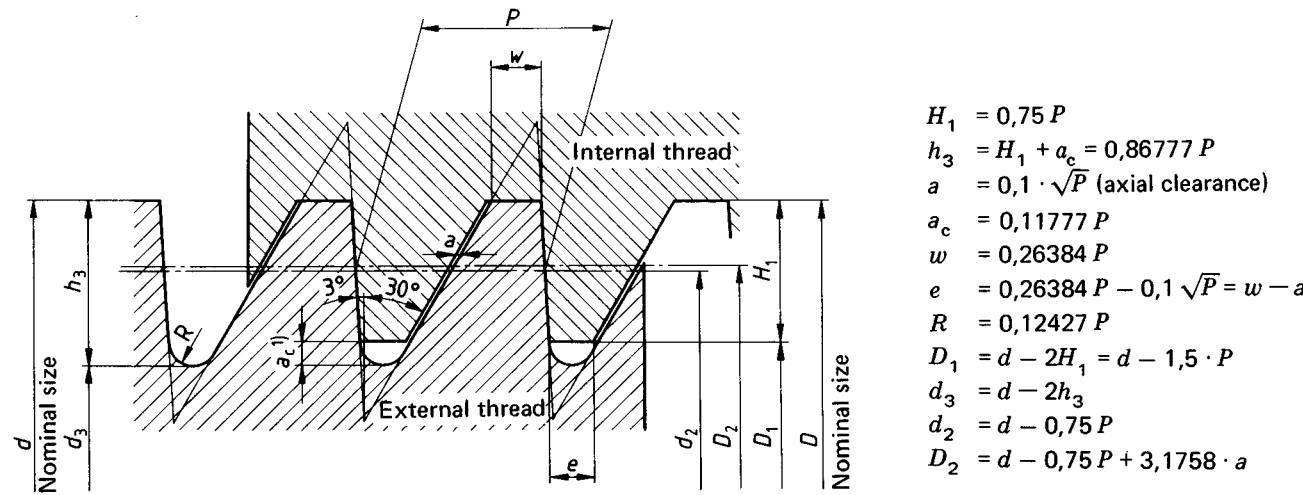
Profiles for external and internal threads with clearances on the non-loadbearing flank on the minor diameter but with no clearance between the loadbearing flanks or on the major diameter (nominal sizes)
